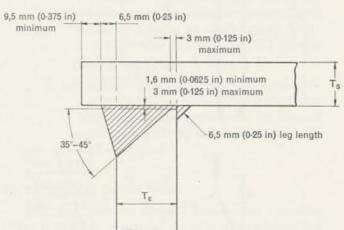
Attachment of Unflanged Flat End Plates to Shell
